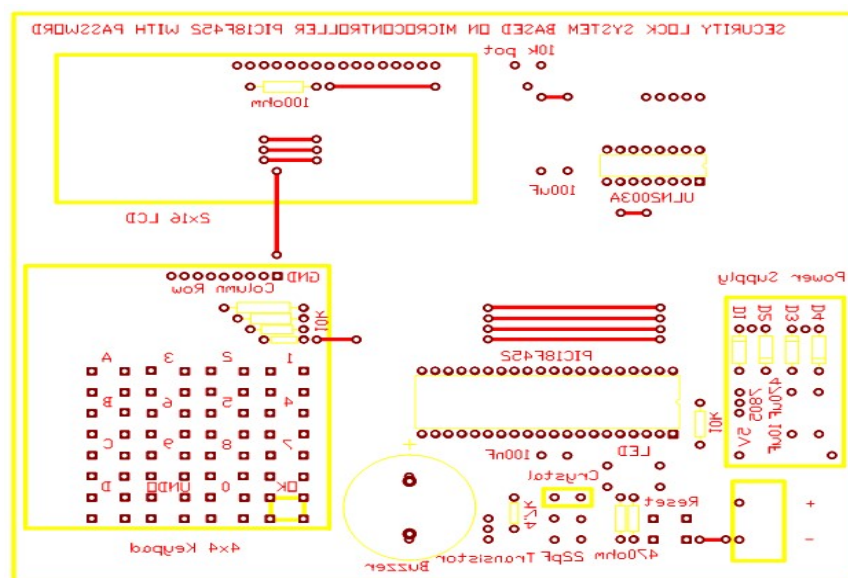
Top layer (Mirror View) PCB layout of security lock system
